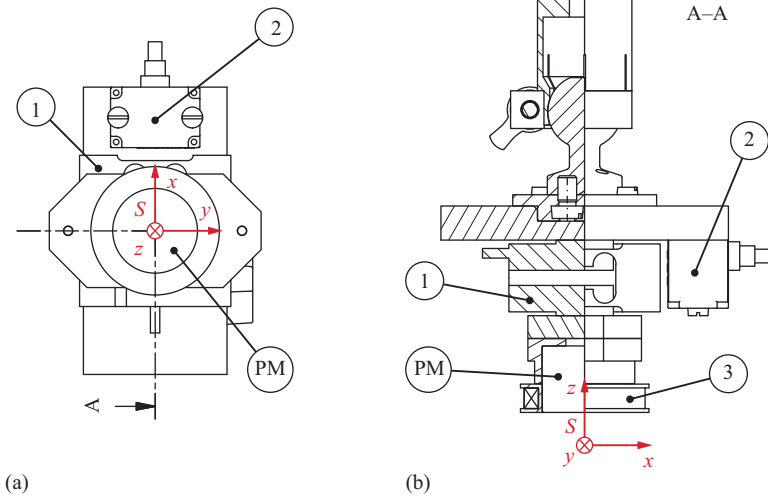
Technical drawing of the assembled sensor system of the experimental setup: (1) multicomponent force sensor, (2) acceleration sensor, and (3) coil with multiple turns. (a) Bottom view. (b) Side view.
